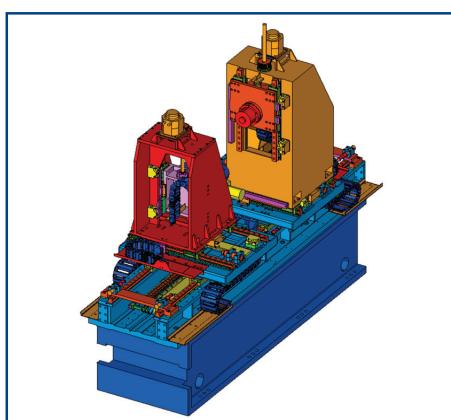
Stand STD1 build in RCMT as a prototype of seismically balanced tool machine with one floating axis
